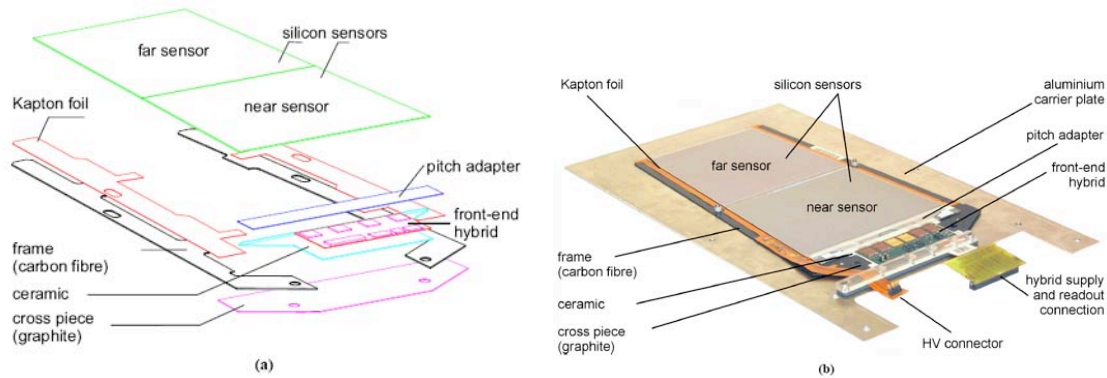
Exploded drawing (a) and photo (b) of a real TEC module for ring 6. The photo shows the module mounted onto its aluminum carrier plate used during transport.
